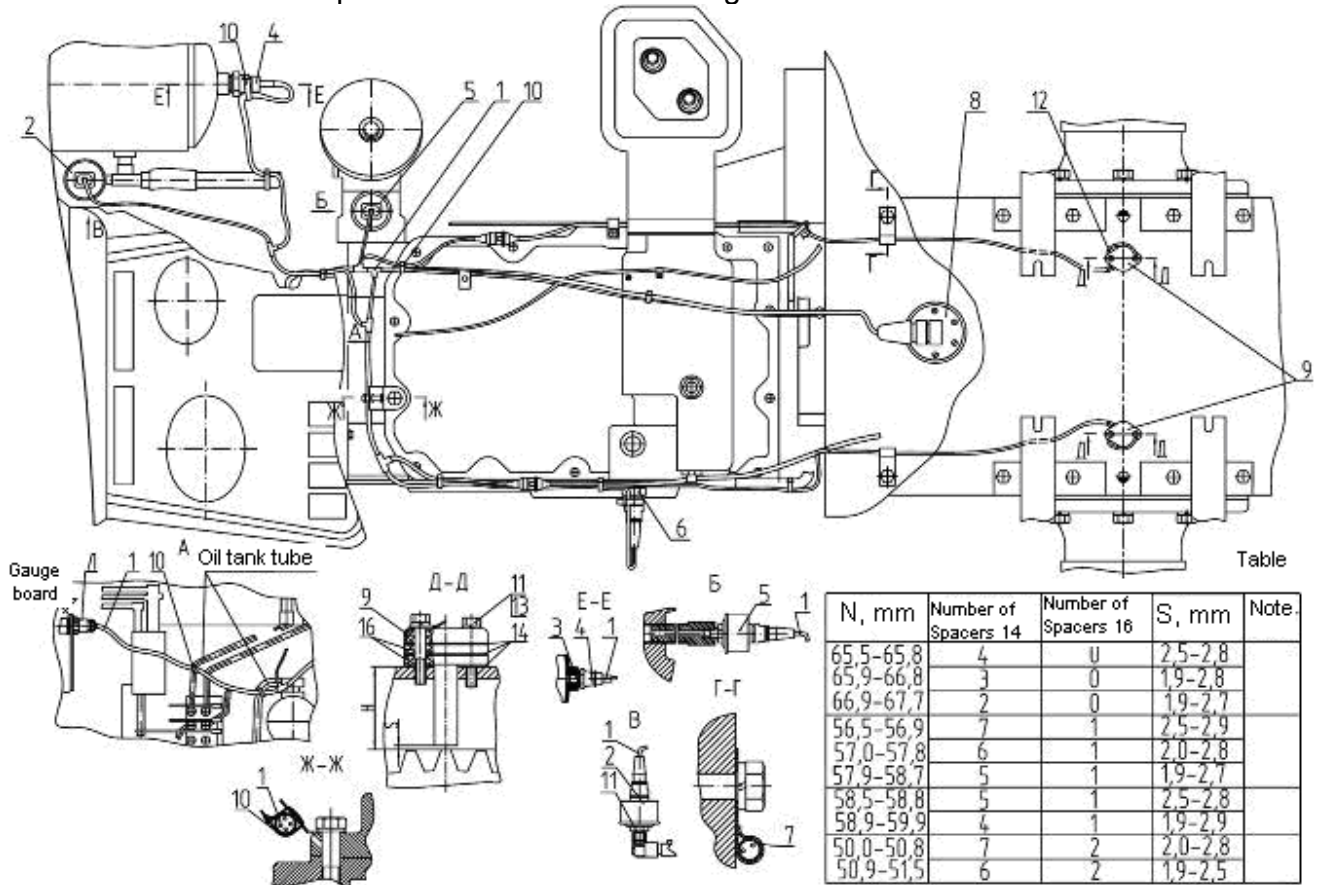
Transmission electrical equipment of tractors BELARUS-1221.2/1221B.2/1221.3
